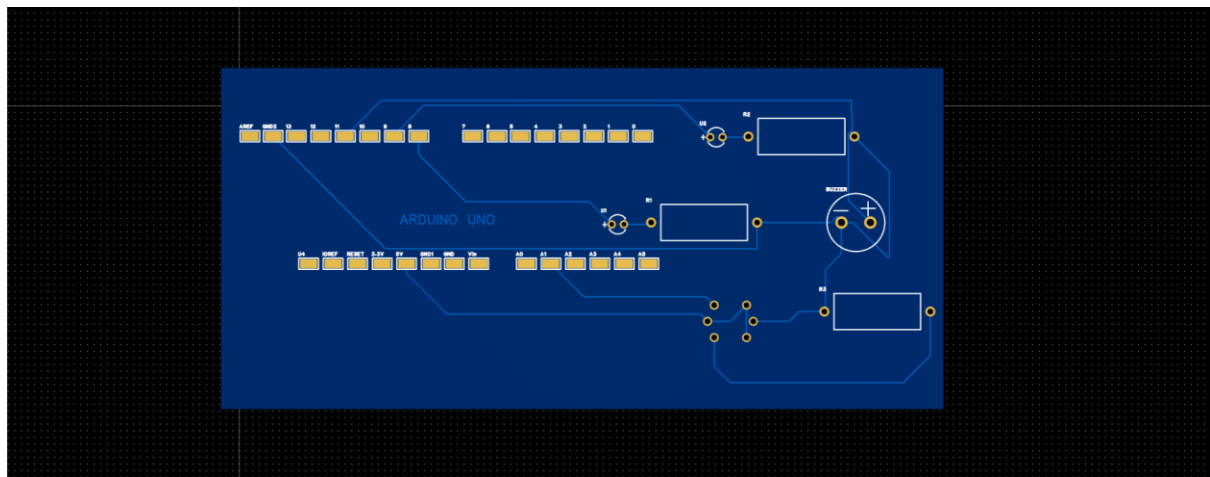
2D PCB layout of the proposed alcohol detection system designed using EasyEDA.
